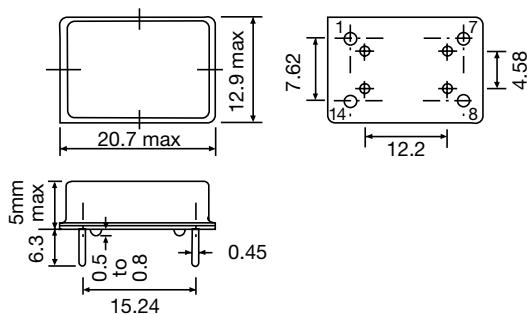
ECS-1000 Series – Top, Bottom and Side views
